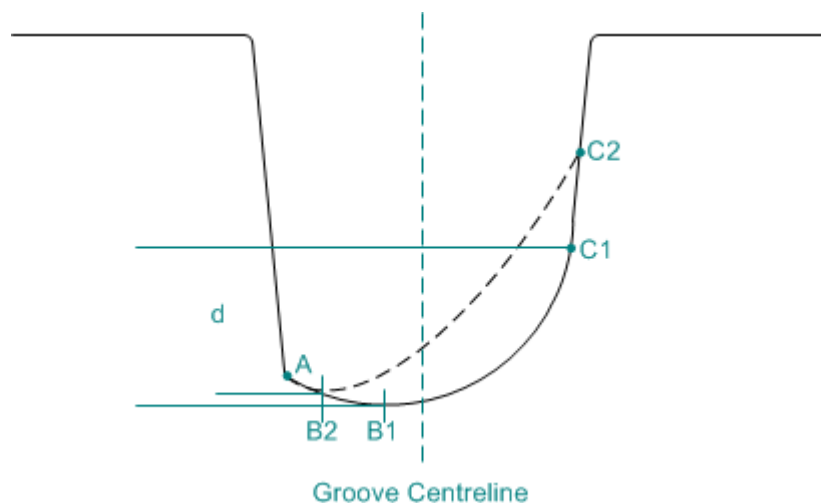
Example of a concave asymmetric weld profile.
